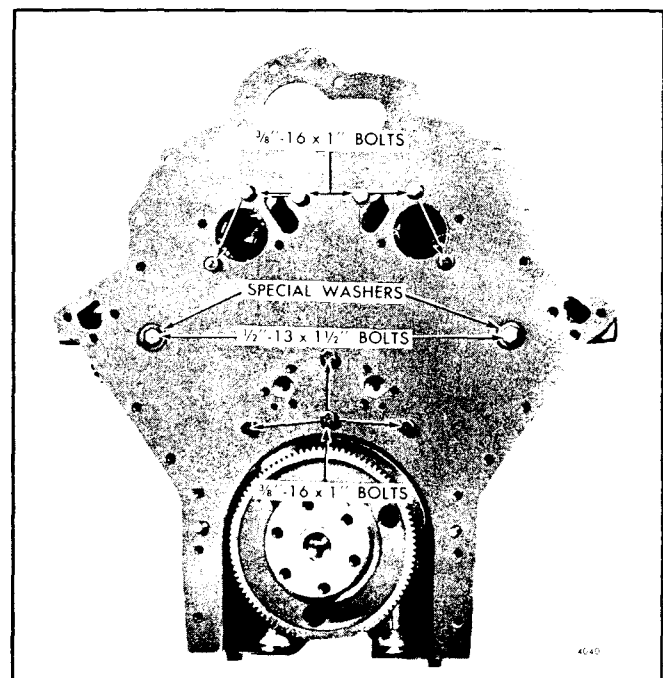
Cylinder Block Rear End Plate Mounting (V-Type Engine)
